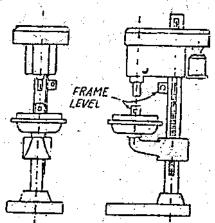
(c) Test for perpendicularity of drill head guide with table.
